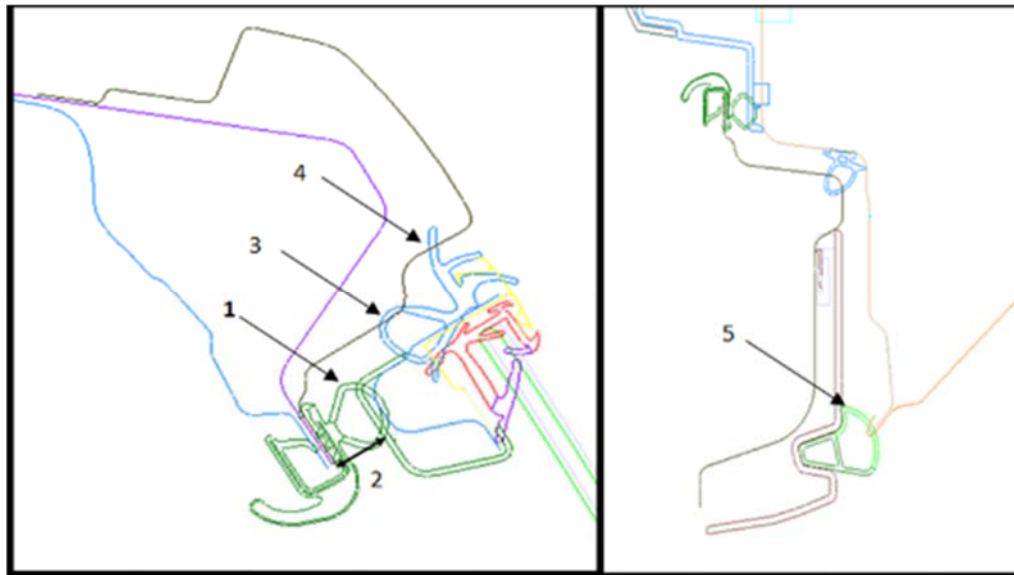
Cross Section for the Seal. (1) Secondary Seal, (2) Secondary Seal Gap, (3) Primary Seal, (4) Header Seal and (5) Rocker Seal [55]
